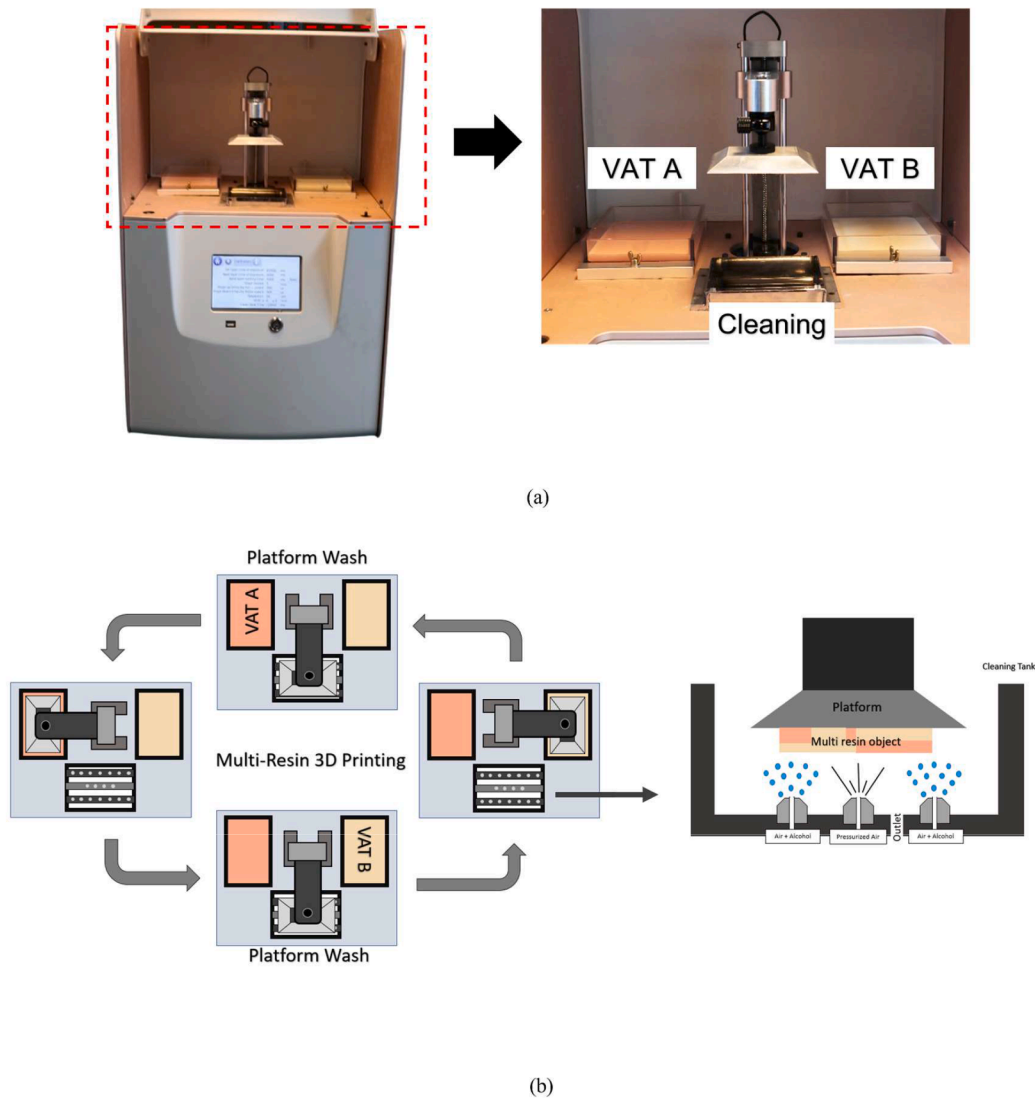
Multi resin 3D printing (a) Multi resin 3D printing machine overview (b) schematic diagram of working principle and the cleaning system.
